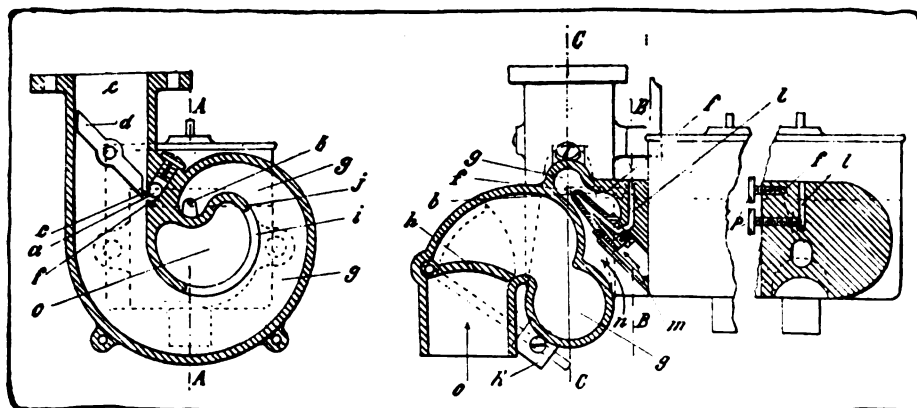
Three sectional views of "turbine" carbureter; h' the adjustable weight
